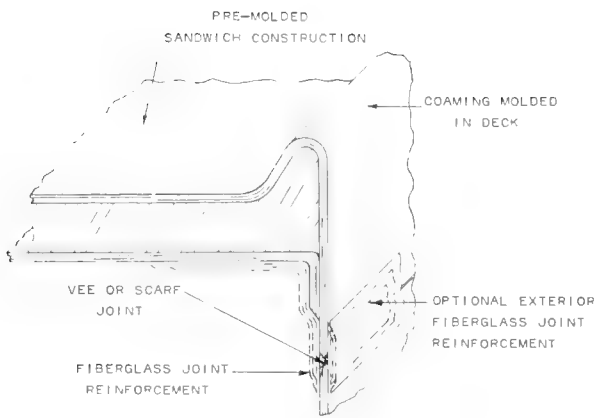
Deck Edge Connection - Sandwich Deck with Molded-in Coaming and Joint in Shell
